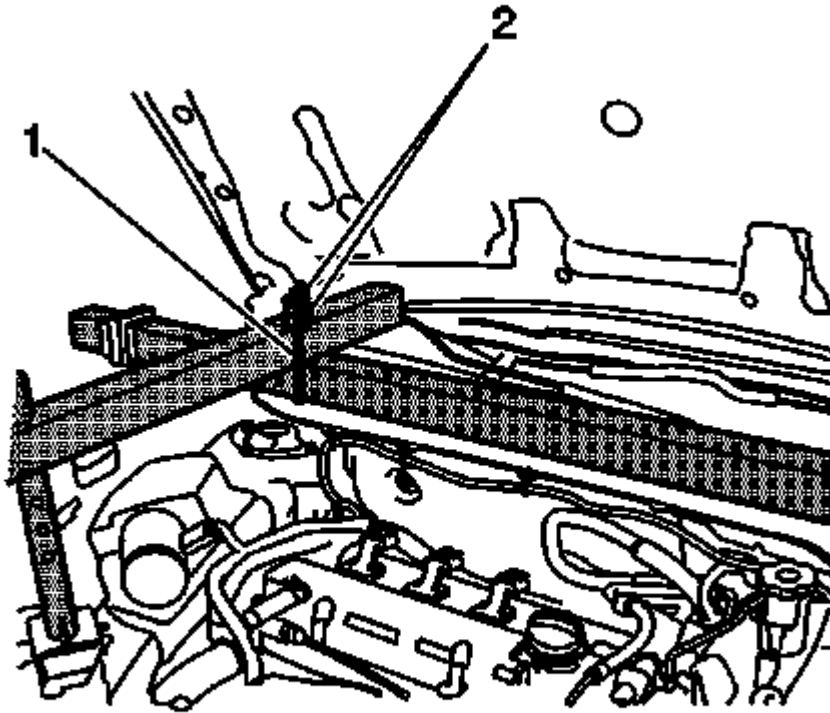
View Of Engine Support Fixture & Cross Bracket
